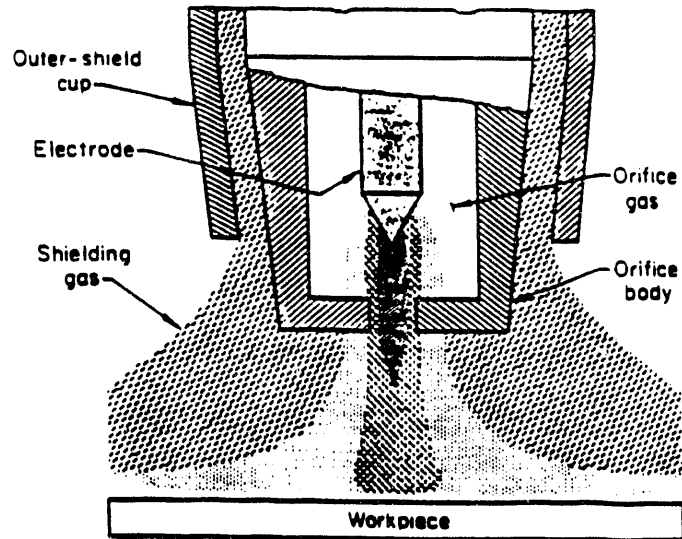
A schematic of the Plasma Arc Welding.
